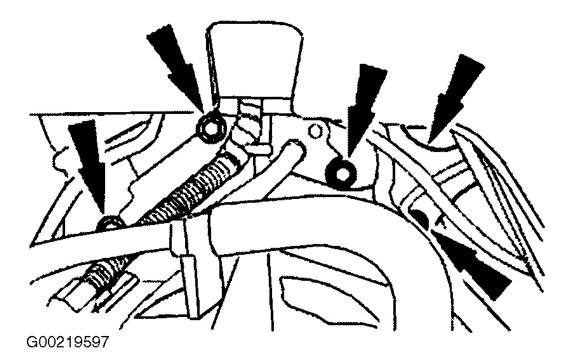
Removing/Installing Engine-To-Transmission Bolts (4.0 Liter) Courtesy of FORD MOTOR CO.
